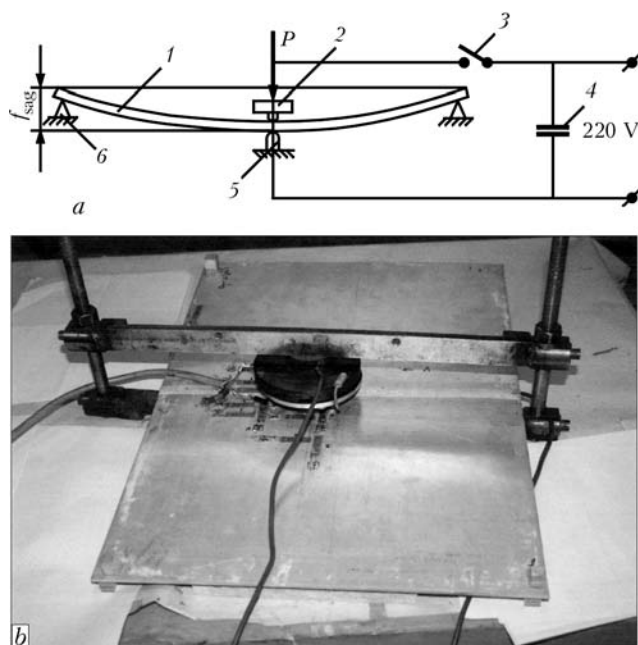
Electric pulse treatment of specimens of welded joints: *a* — scheme of current supply and three-point bending of plates (1 — specimen; 2 — electrode; 3 — electric switch; 4 — bank of capacitors; 5 — current connector; 6 — support); *b* — specimen of butt joint of alloy AMg6 fixed in a loading device
